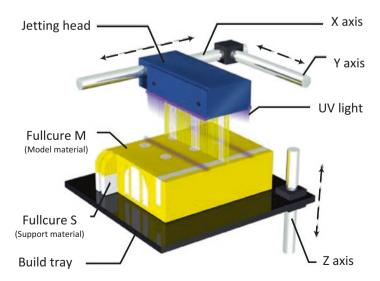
Printer technology used on an AM machine. (Photo courtesy of Objet)
